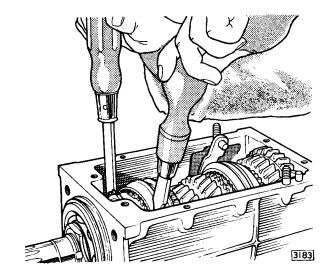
With the aid of two levers ease the constant pinion shaft forwards
